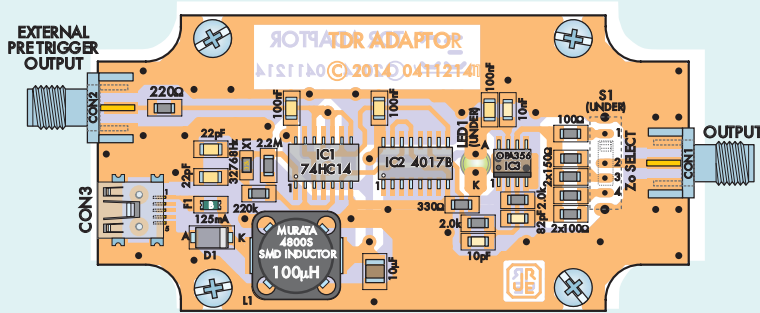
the PCB overlay diagram, shown actual size. Most of the parts are SMDs and are mounted on the top of the PCB. LED1 and selector switch S1 are mounted underneath.
